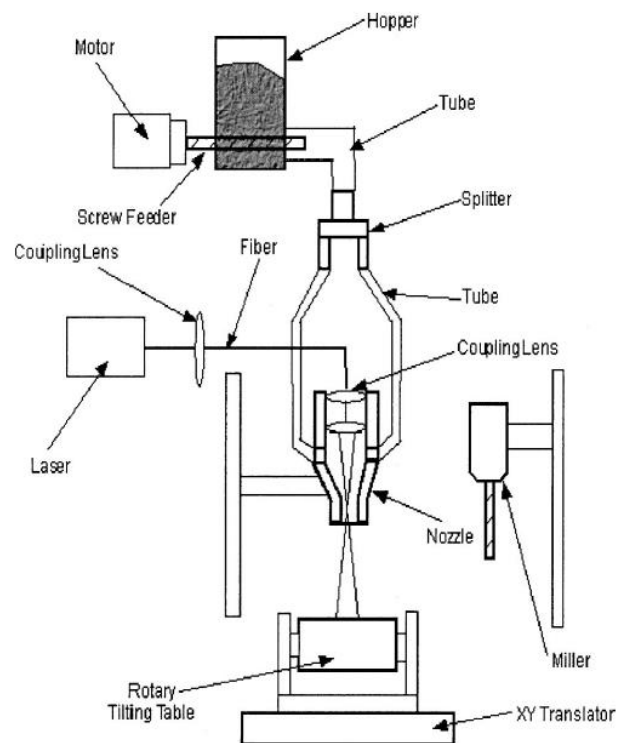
Five-axis milling machine equipped with a laser cladding unit (Zhang and Liou, 2004)
